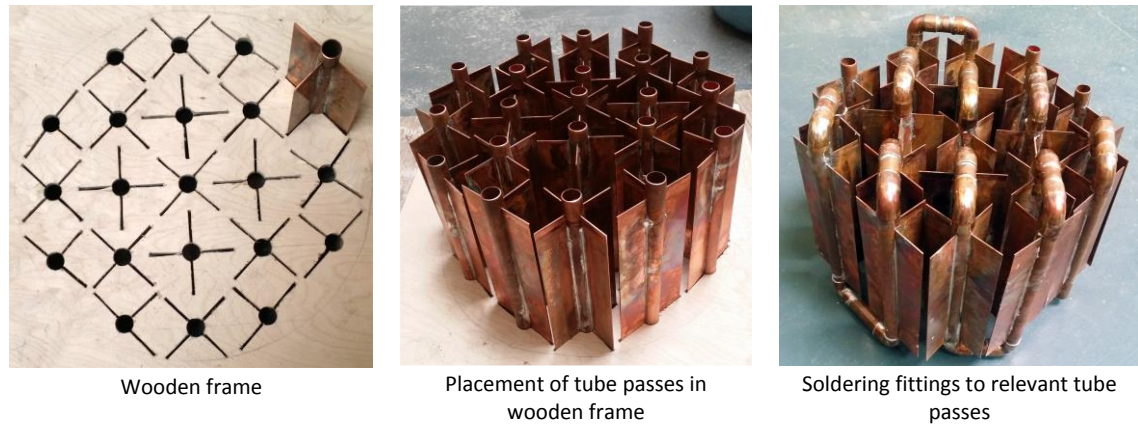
6 Step 3: Placement of tube passes in wooden frame and soldering fittings to create proposed tube passes pattern in shell container
